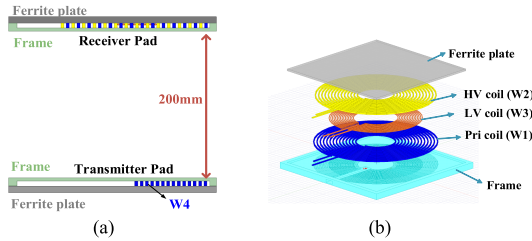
Charging pads structure. (a) Section view of two pads. (b) Explosive view of the Rx pad.
